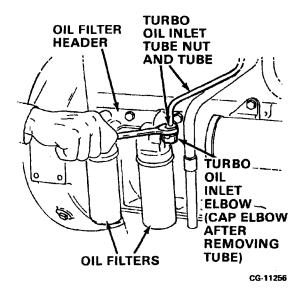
Removing Turbocharger Oil Inlet Tube and Sleeve at Oil Inlet Elbow
